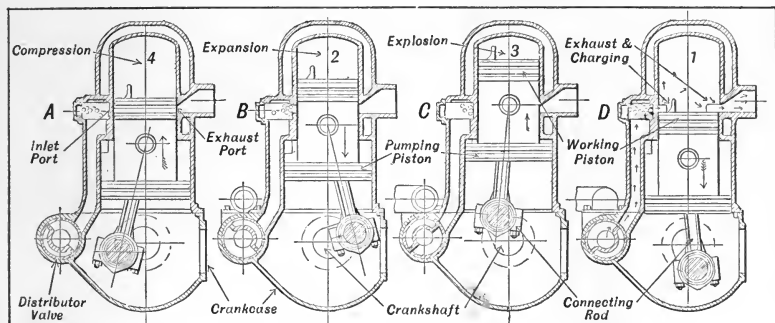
Explaining Action of Differential Piston Type of Two-Cycle Engine.
